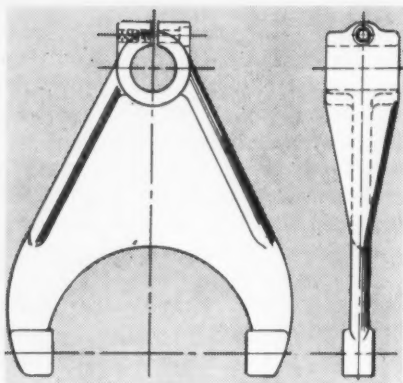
The desire for a lightweight, yet strong, shifting fork prompted the design shown in this particular sketch to be made.
